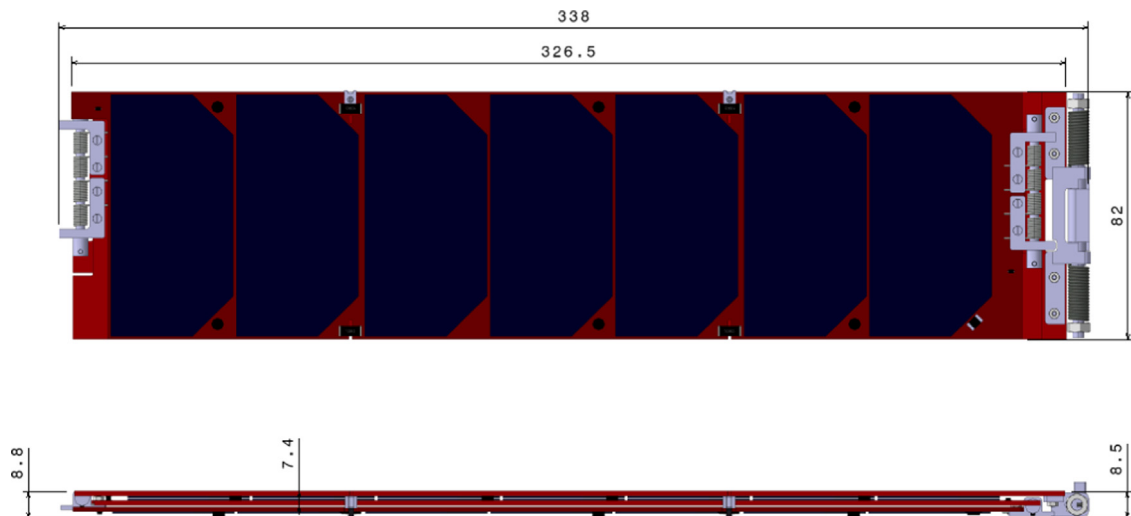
Solar panel pack assembly in stowed configuration. Dimensions in millimeter.
